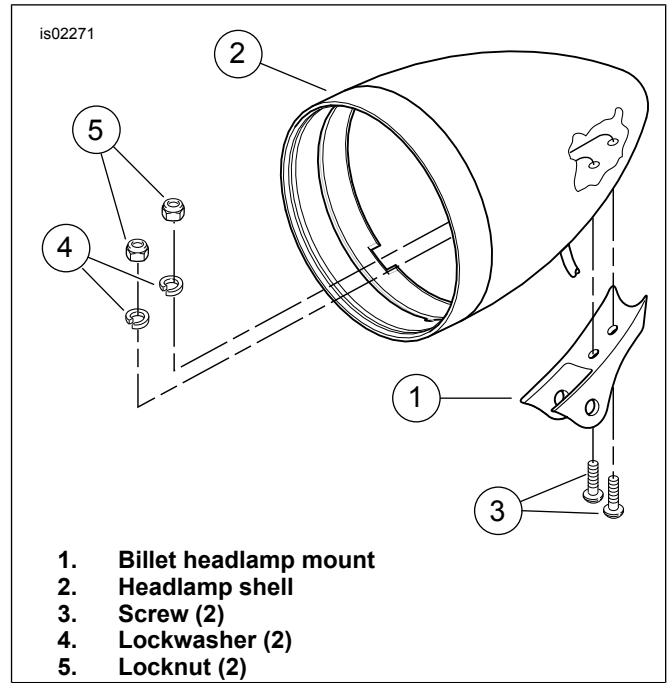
Install Wiring Harness in Billet Headlamp Shell
